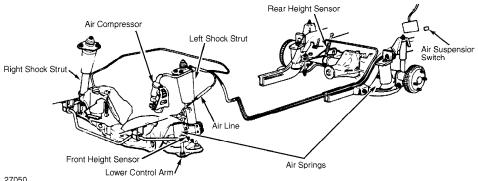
Exploded View of Air Suspension System Courtesy of Ford Motor Co.
